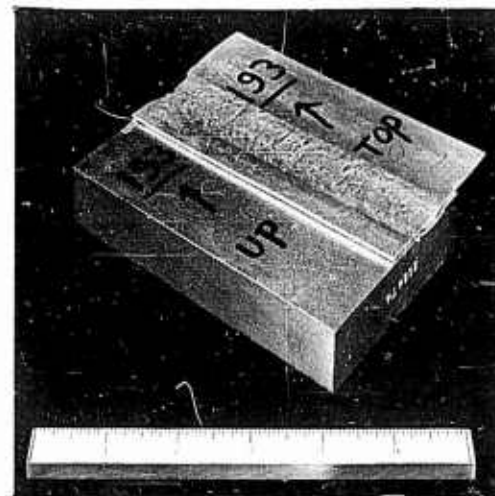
1/16-in-thick 2024-T3 aluminum-alloy panel explosively welded to 1-in-thick 2024-T-4 aluminum-alloy plate
